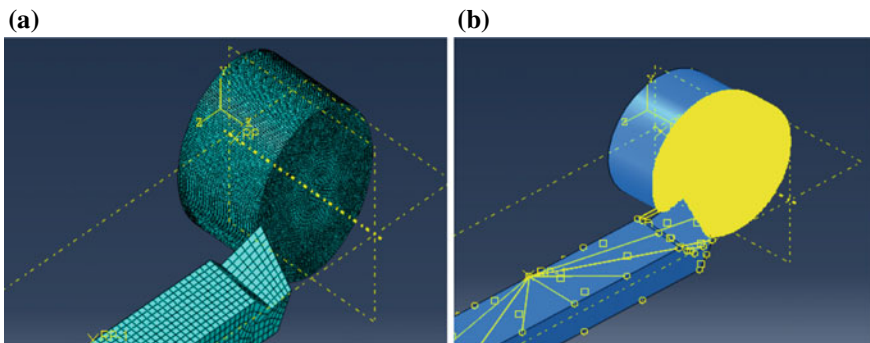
a Meshing and b constraints added to the workpiece and tool
